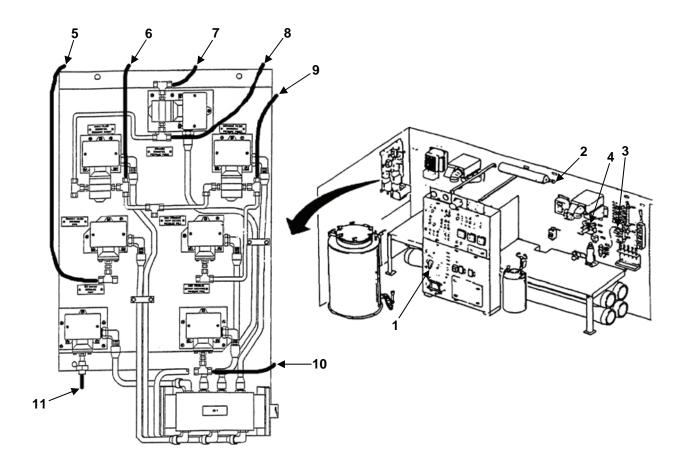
Pressure Switch Panel Assembly (Sheet 1 of 4). (Model ROWPU-1 Only)
